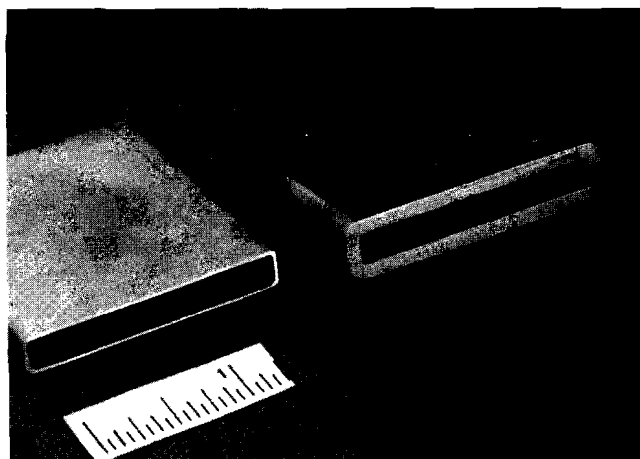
ASSORTED TUBULAR COMPONENTS OF ALUMINUM AND STEEL PRODUCED WITH BATTELLE'S HYDROSTATIC EXTRUSION TOOLING INSTALLED IN 2500-TON HYDRAULIC PRESS⁽¹⁰⁾
